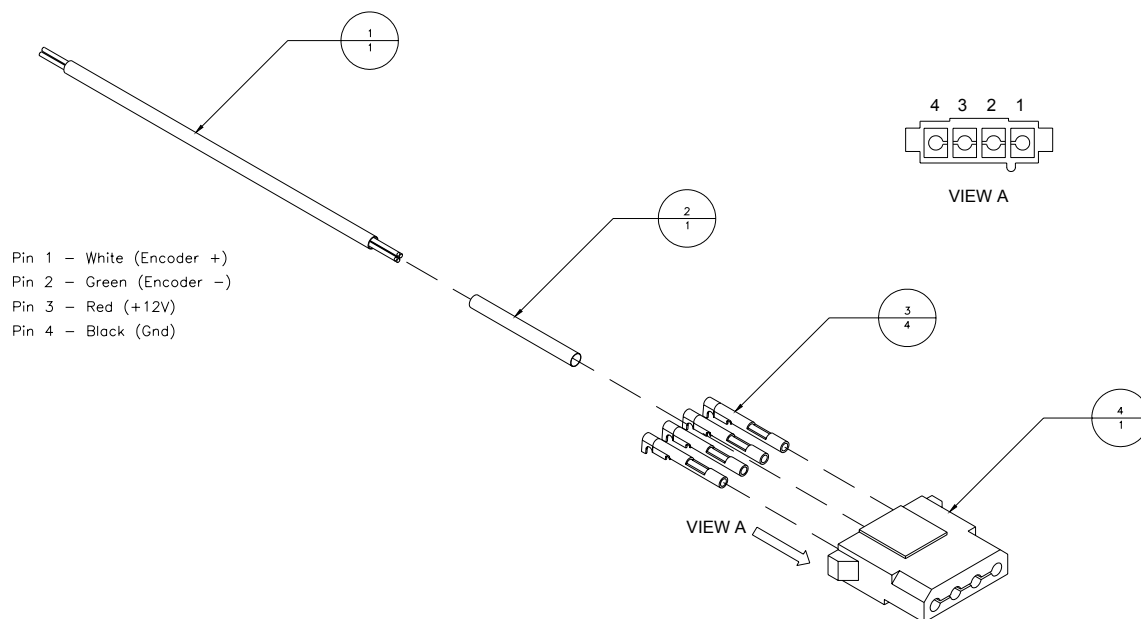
Cable, Shaft Encoder Extension (606601A)
